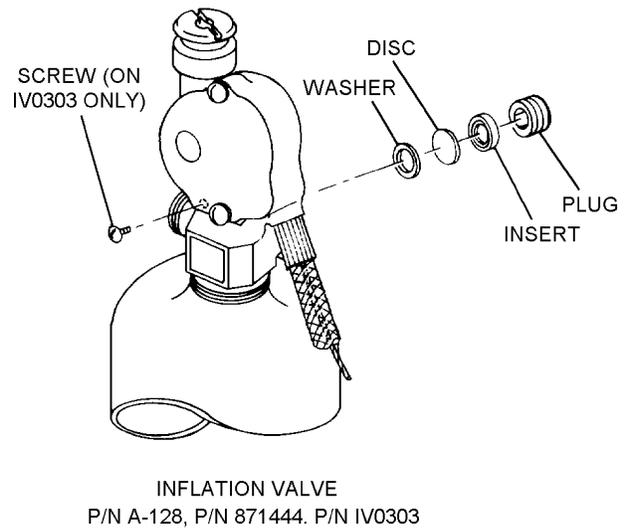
Disassembly of Inflation Valve Safety Disc Assembly
